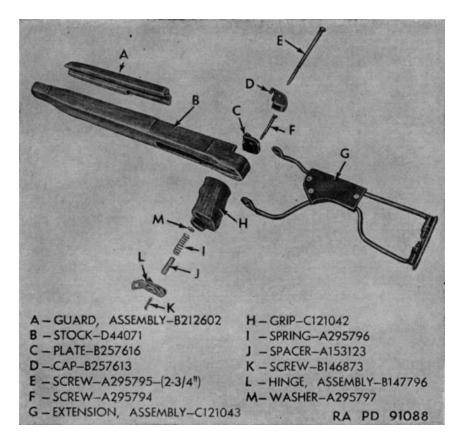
Stock extension group parts — carbine, cal. .30, M1A1.
